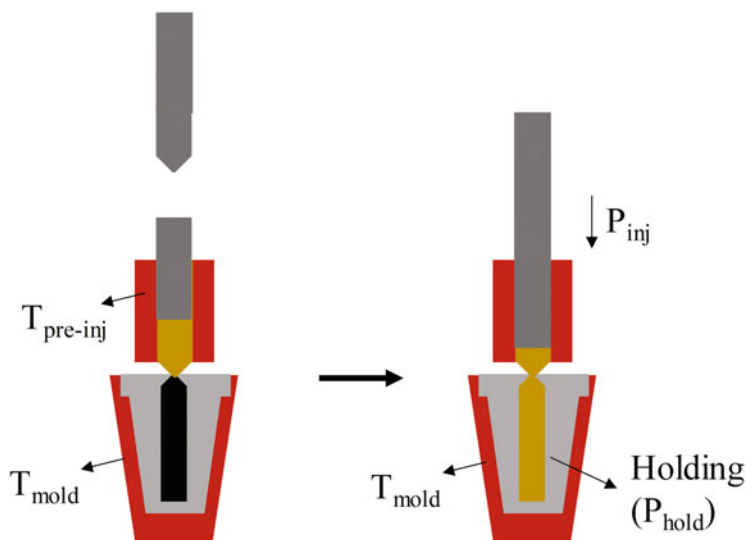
Scheme of a vertical plug-type injection molding equipment
